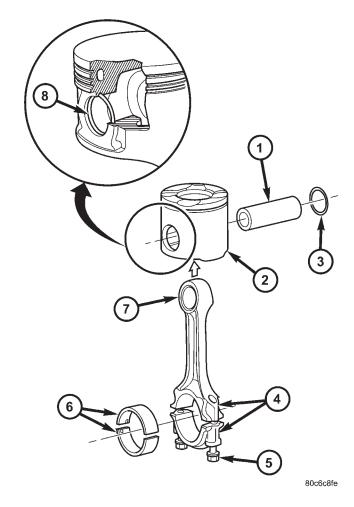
PISTON AND CONNECTING ROD ASSEMBLY
